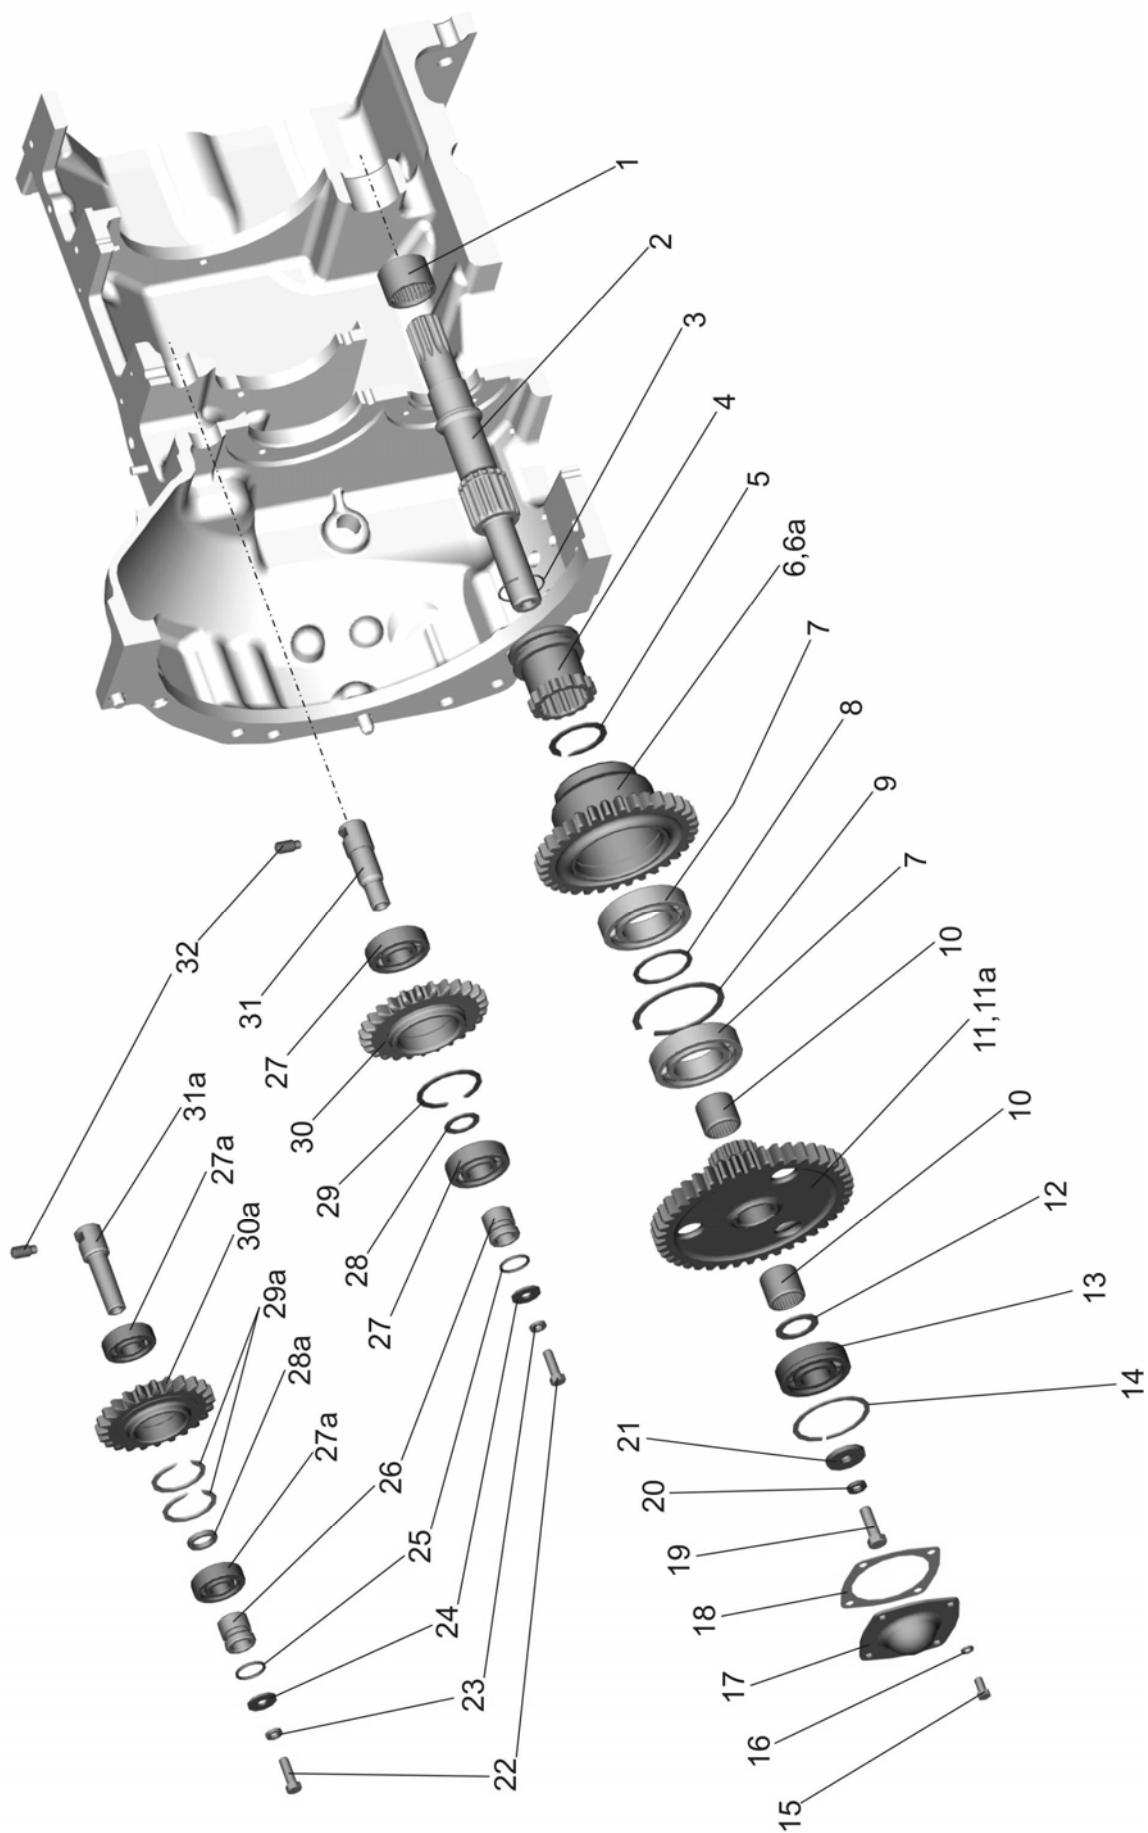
Clutch casing (PTO drive, mounted attachment hydraulic system pump drive)
